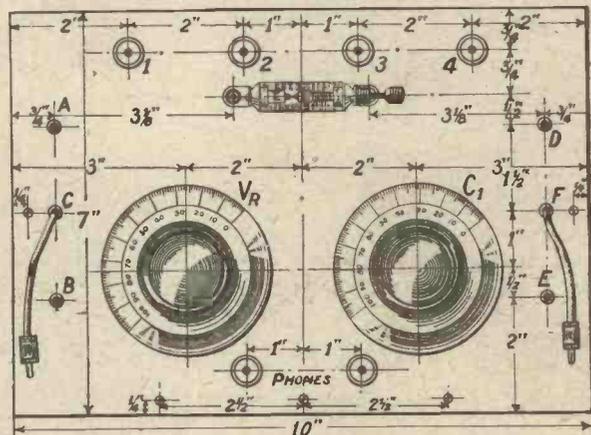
The dimensions for the symmetrical panel layout may be taken from this scale drawing. Blueprint No. C1077A.
